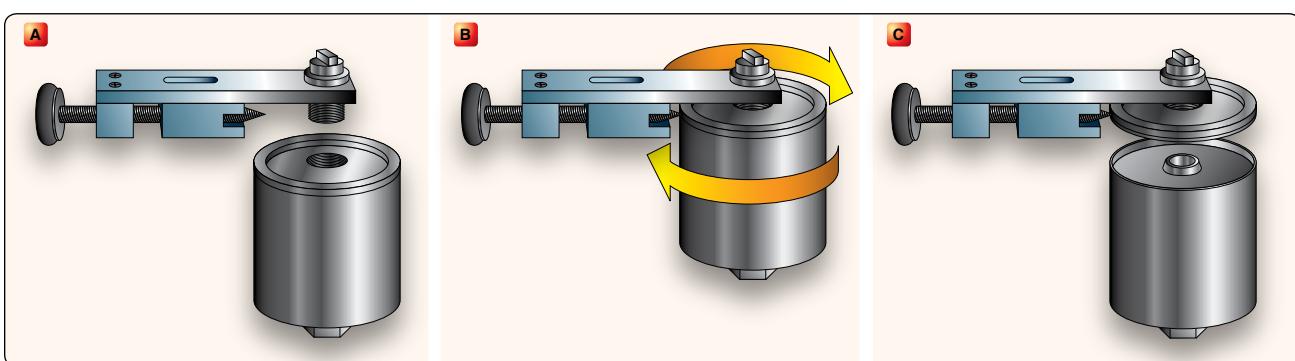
Cutting open a spin-on type oil filter using a special filter cutter.
